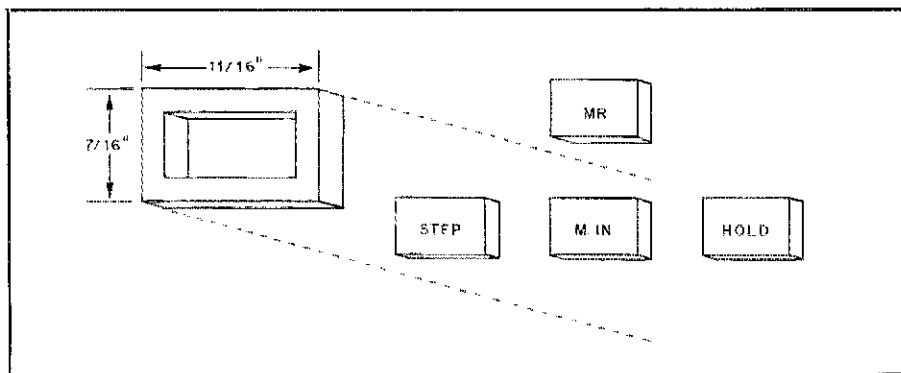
Dave Miller's memory button guard consists of a single piece of 5/32-inch-thick wood veneer. The dimensions shown may need to be changed to fit your situation.
